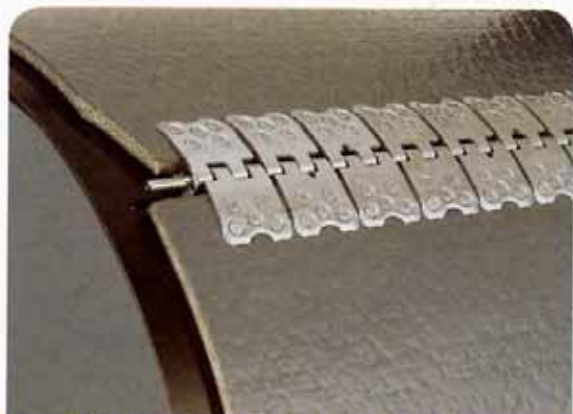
Hinged fasteners - well suited for belt conveyors with smaller pulley diameters.
